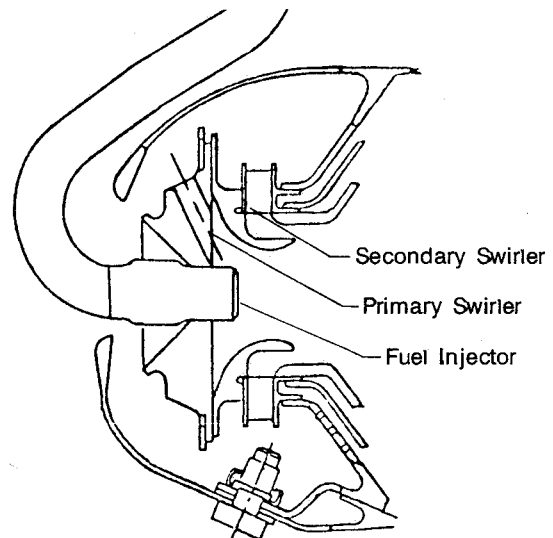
Cross-sectional drawing of F101 combustor dome swirl cup configuration.
